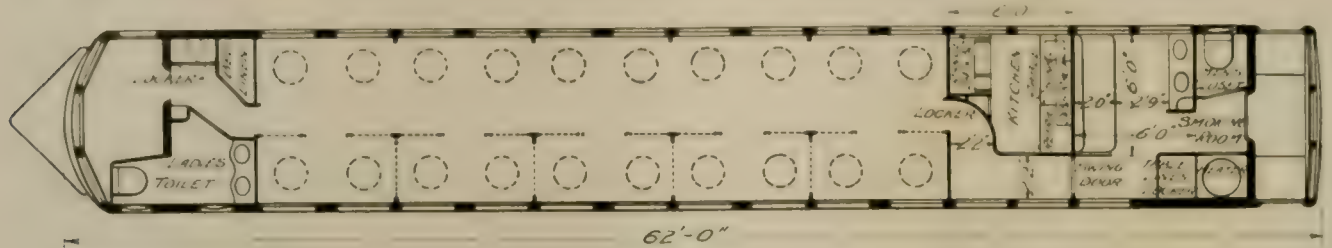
FLOOR PLAN OF HOLLAND SLEEPING CAR
